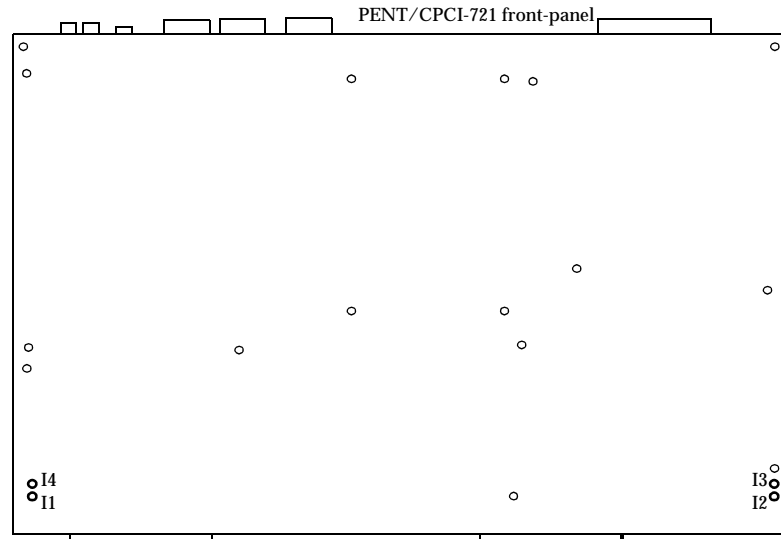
Mounting Points of the I/O-721 on the PENT/CPCI-721
